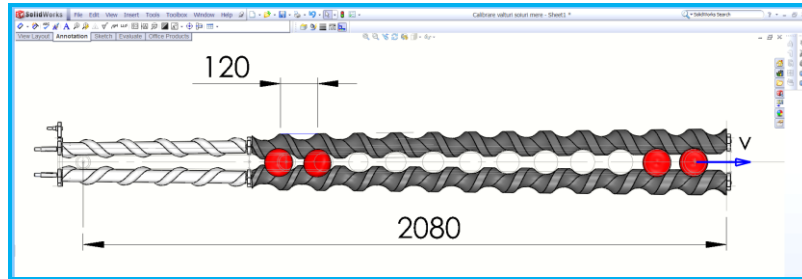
Scheme of sorting parts of spiral rolls type with profiling surface
